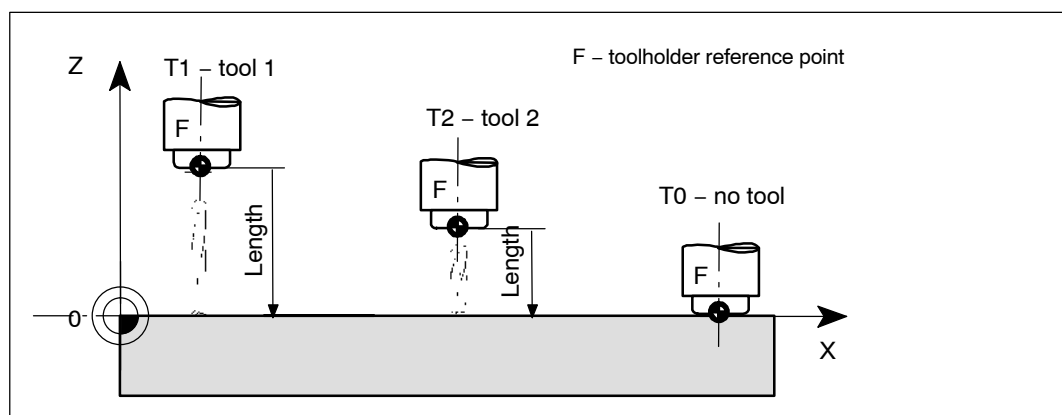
Approaching the workpiece position Z0 – different length compensations
